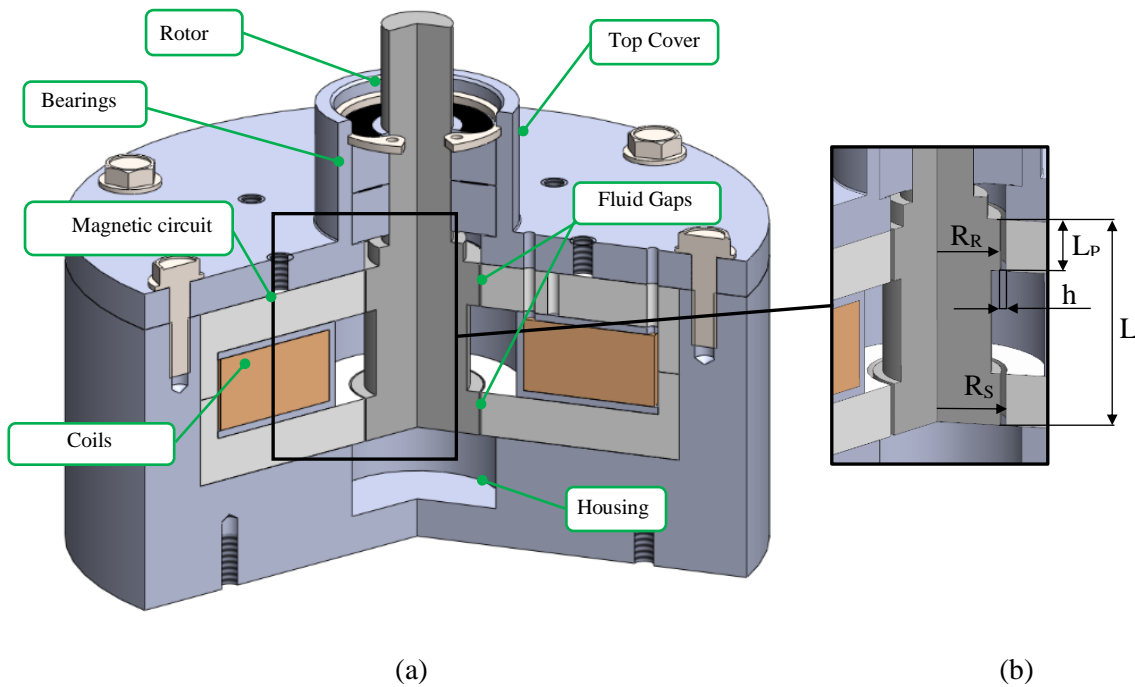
Partial section view of the Searle magnetorheometer (a) and main dimensions (b).
